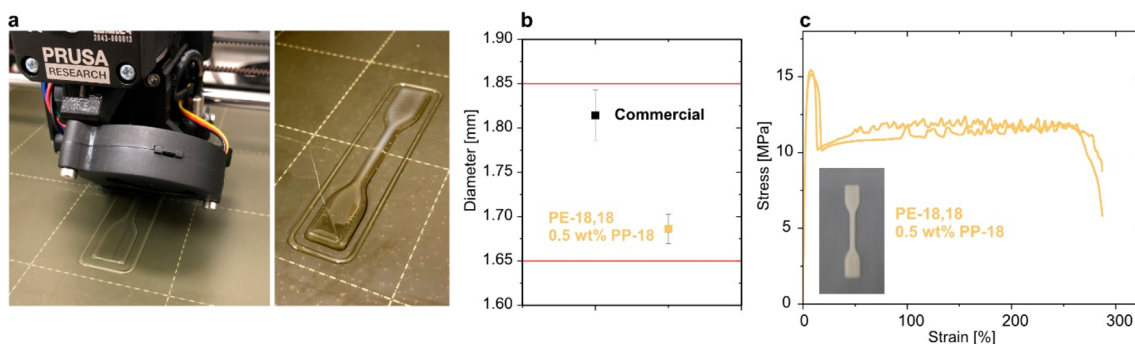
3D printing of PE-18,18 blended with 0.5 wt % PP-18. (a) Fused filament fabrication of a tensile test specimen (ISO 527-2, type 5A, length about 75 mm). (b) Diameter and dimensional accuracy of the extruded blend filament in comparison to commercial polyethylene terephthalate glycol (PETG) filament and specification range for printing on a Prusa i3 MK3S+ printer. Error bars are standard deviations from 40 measurements with a digital caliper. (c) Stress–strain curves of two 3D printed tensile test specimens.
